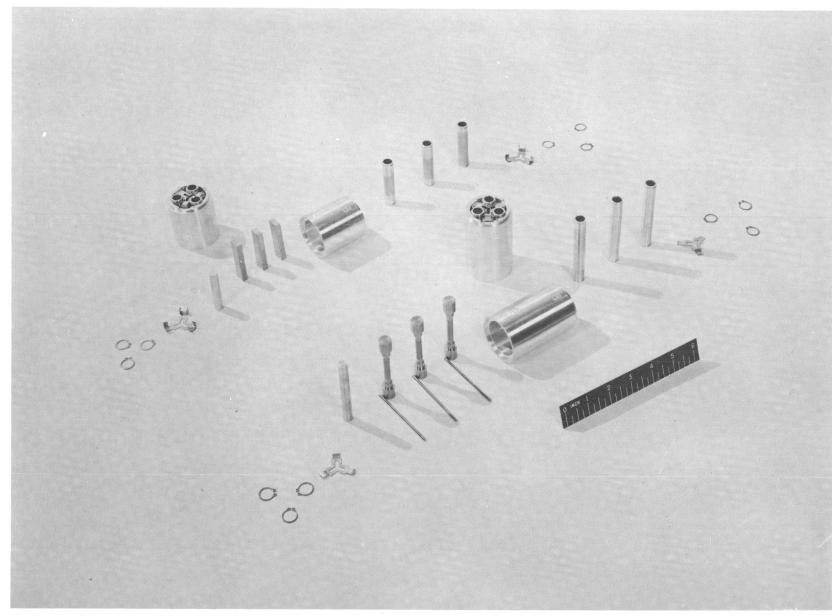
Radiation capsule, corrosion specimen subassembly and permanent test material subassembly.
